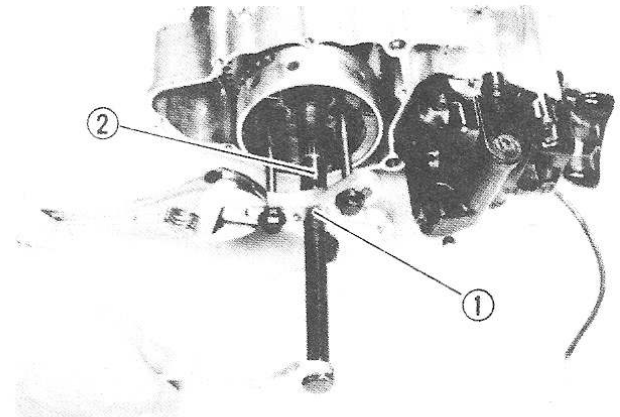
B.40 Tighten the puller screw (1) against the crankshaft (2) to remove the AC generator rotor (Sec 22)
